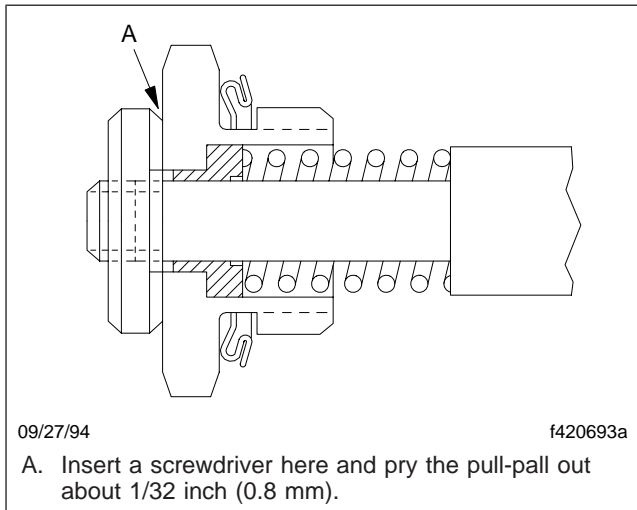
, Disengage the Pull-Pull on Meritor Automatic Slack Adjusters
